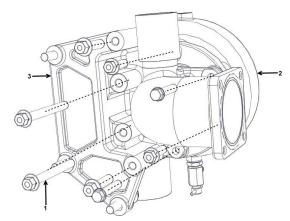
Rear Right-Hand Water Pump Pulley Assembly
